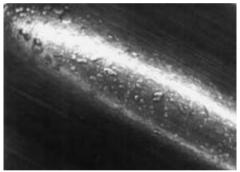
Electric Corrosion on Outer Ring Surface of Deep Groove Ball Bearing
